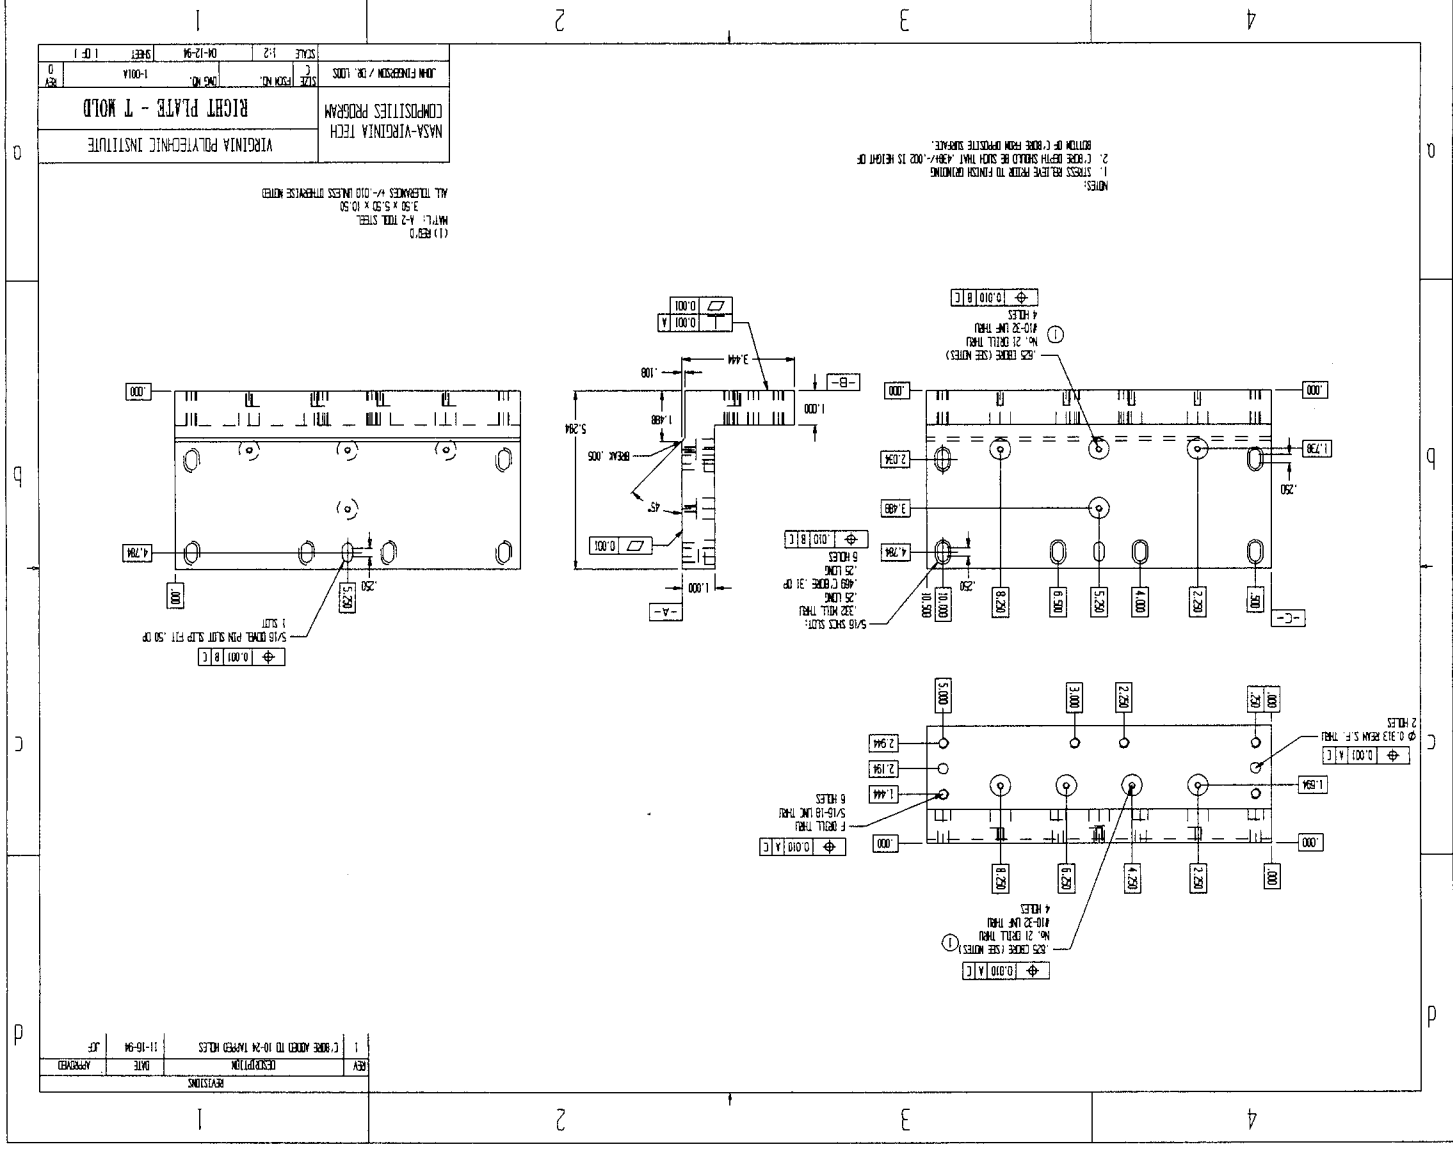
Upper right mold plate, blade-stiffened preform flow fixture.
